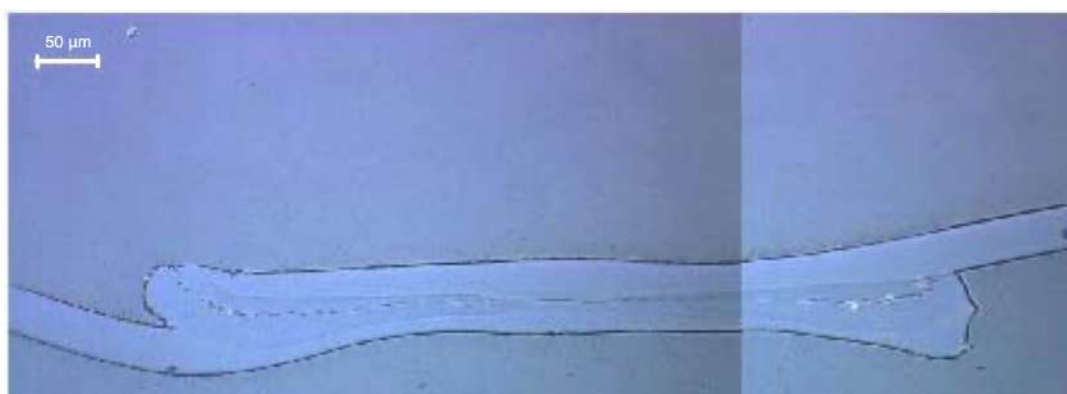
Cross-section of a welded seam where the two sides of the strip are fused.
